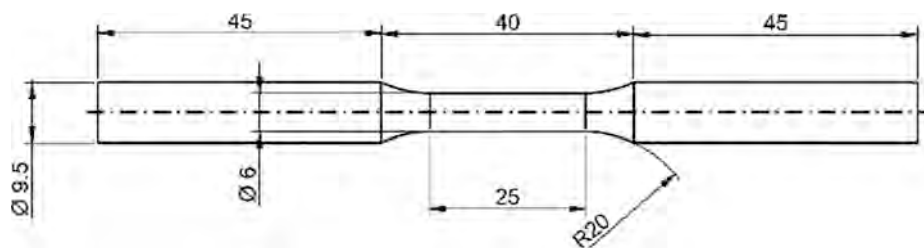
Drawing of the fatigue specimens adopted in this work.
